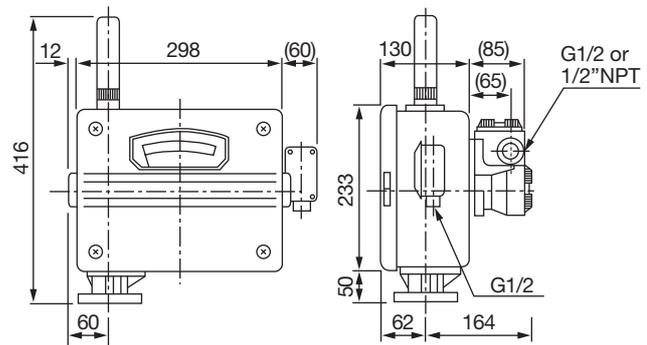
Indicator and transmitter assembly (FS-517W)
